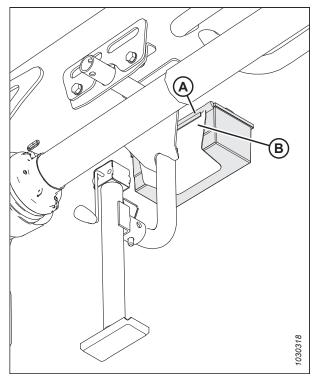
Toolbox Mounted on Jack Stand Bracket
